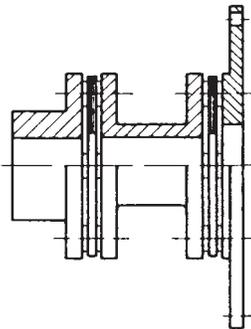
Flange coupling for connection to engine fly-wheel or fluid couplings.
